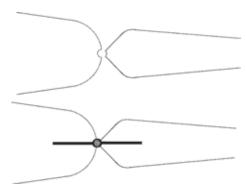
Hinge line detail - removable hinge pin, and relieved corners.
